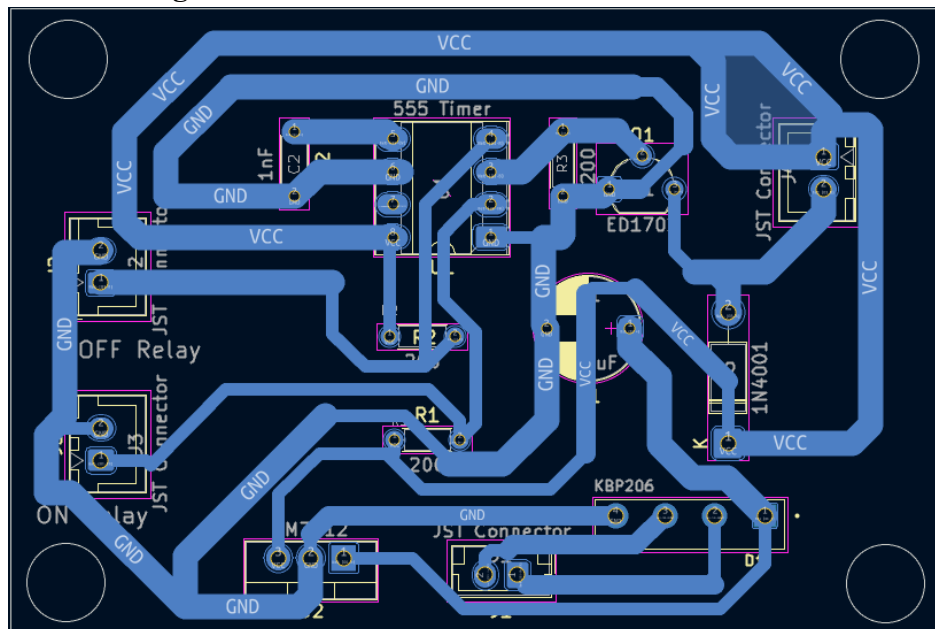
Redesigned PCB layout with improved routing and clearer separation of power, control, and output sections.
